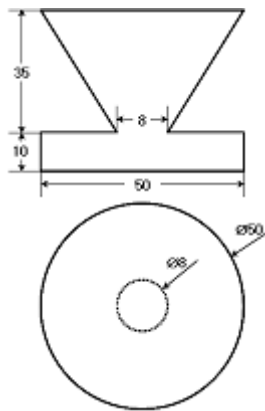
The shape and dimension of the test specimen obtained by machining from ingots
